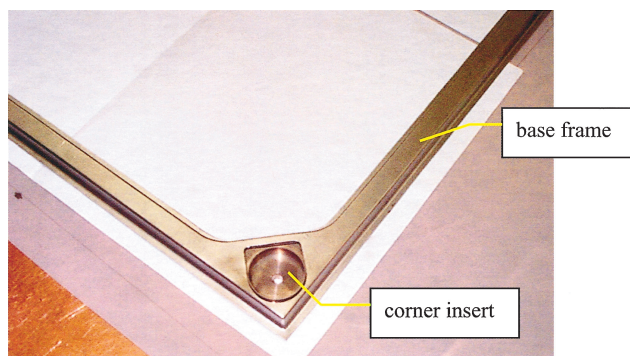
Enlarged view of corner insert installed in Ti-6Al-4V base frame.
